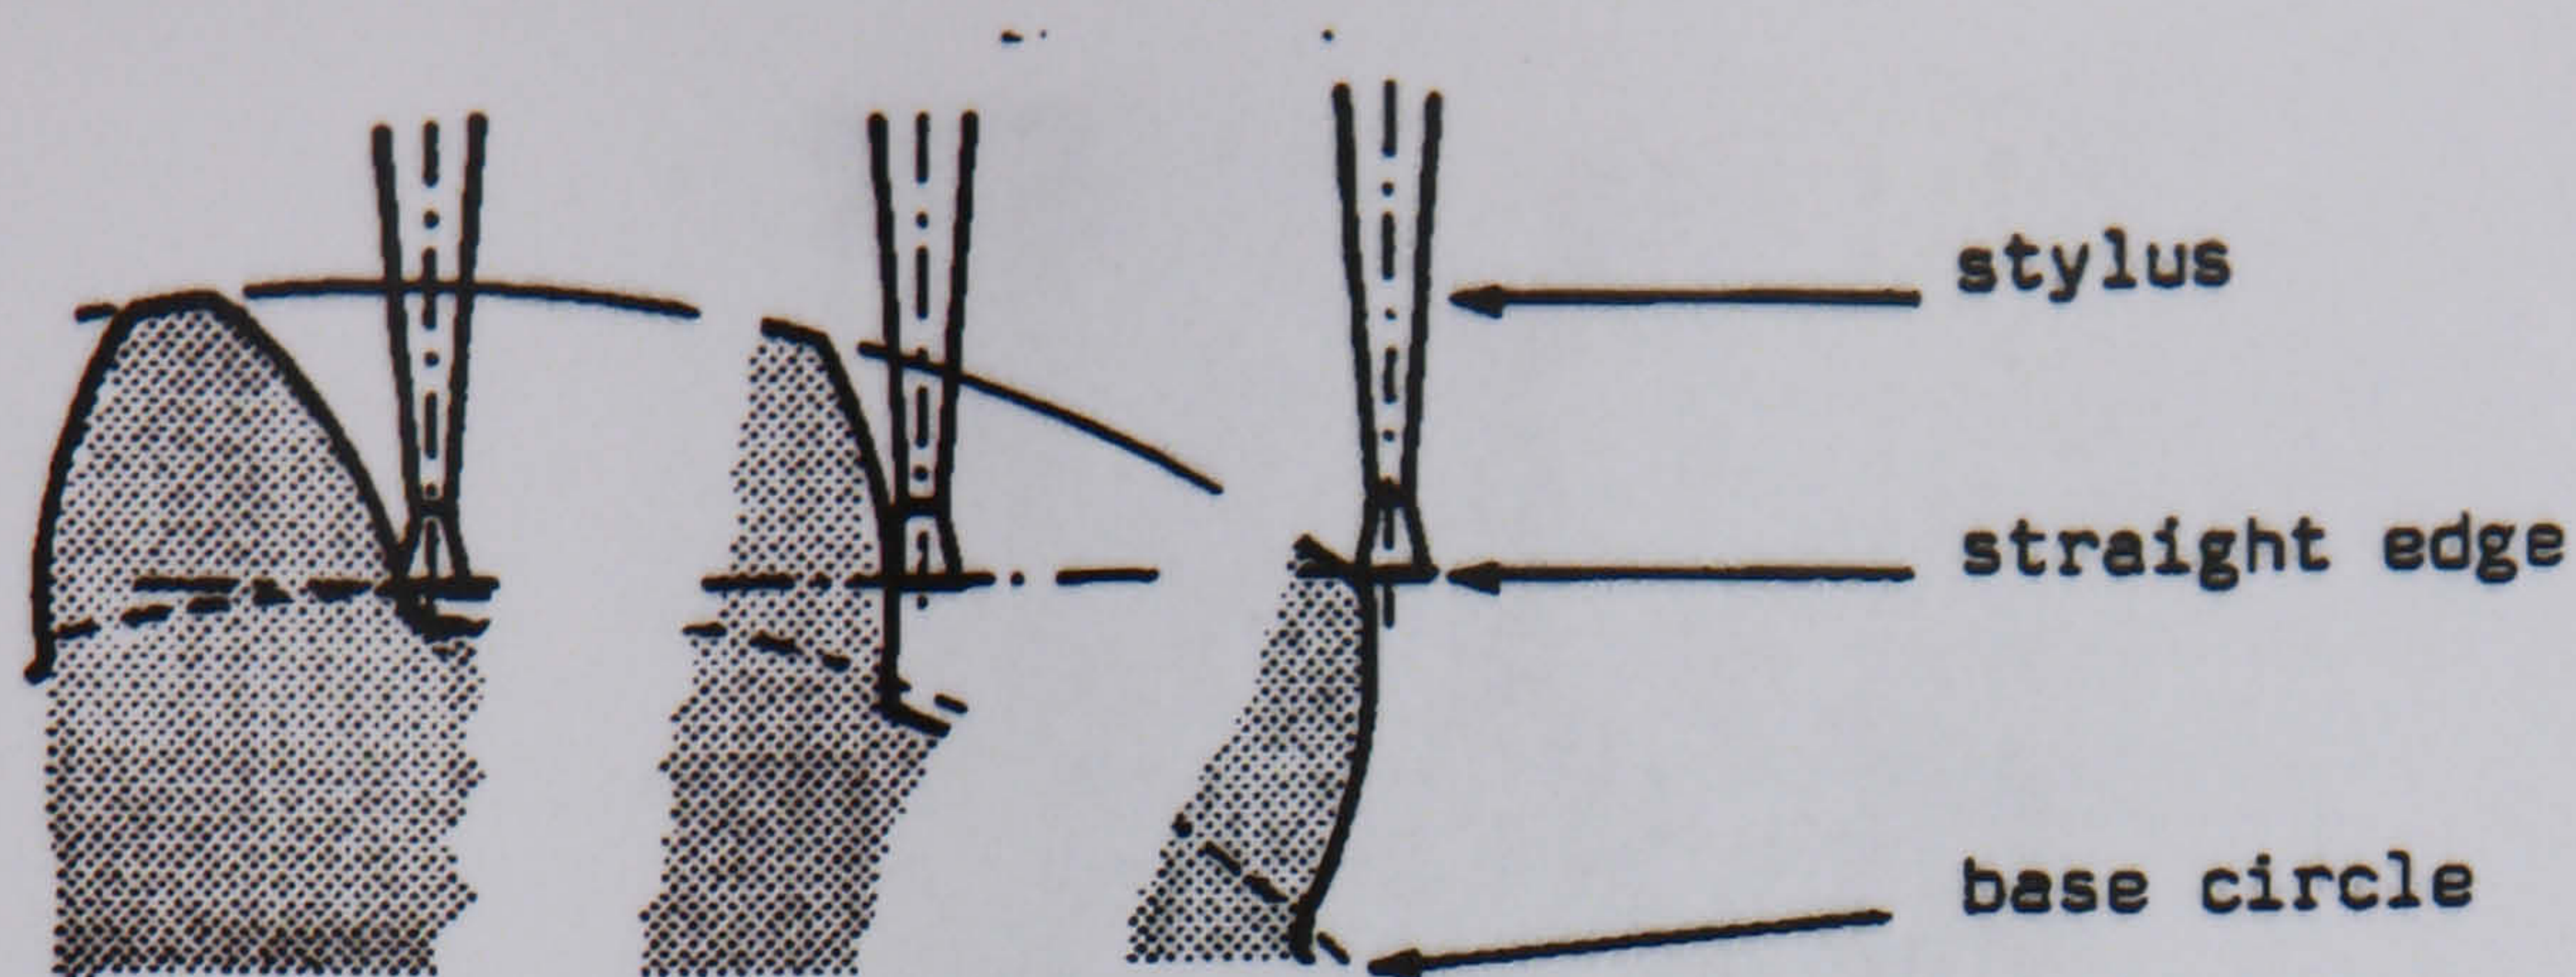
Involute gear measurement using a rolling base disc [Munro]
